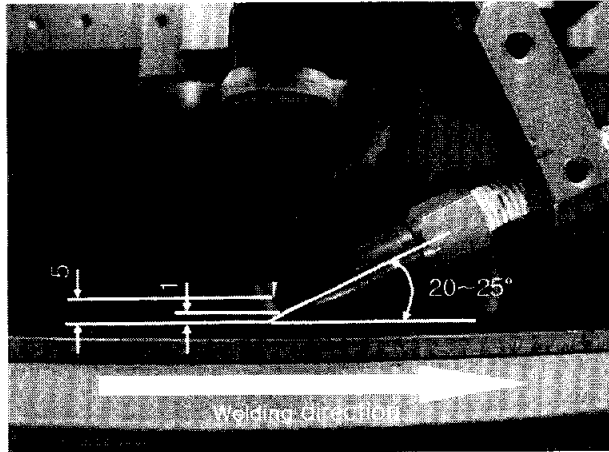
Equipment of TIG welding with filler wire
